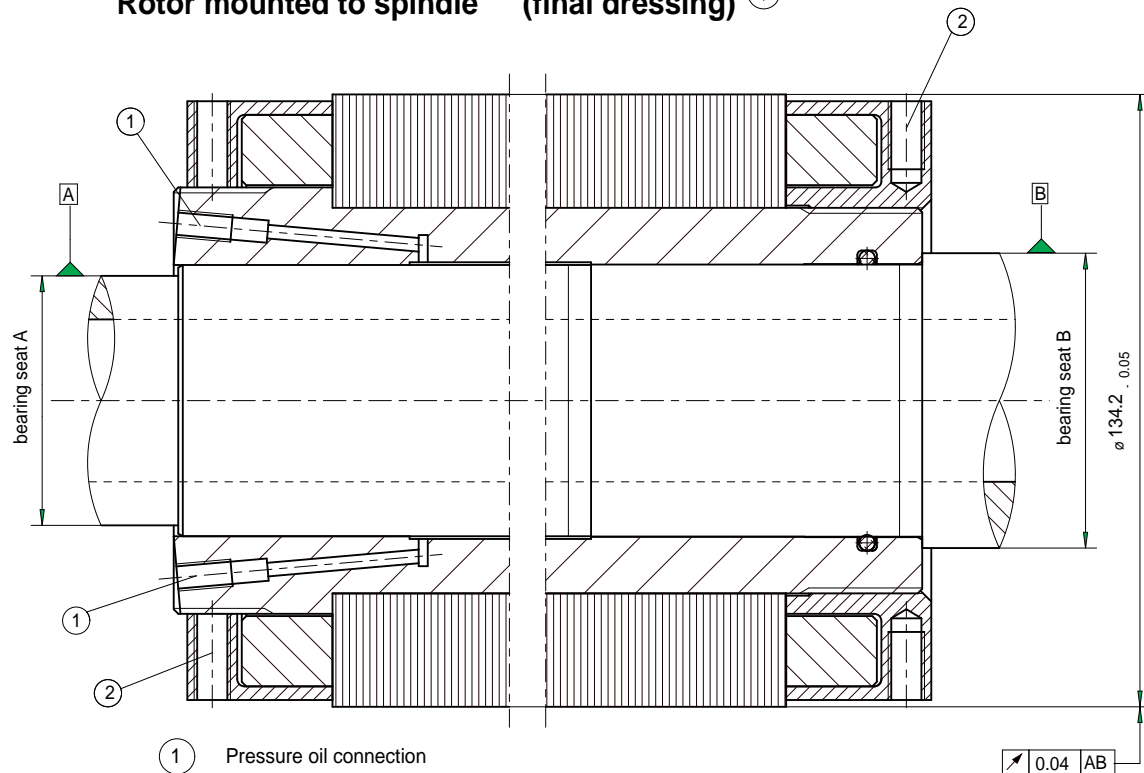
1MB 200 frameless spindle motor - dimensional data (part 2)
